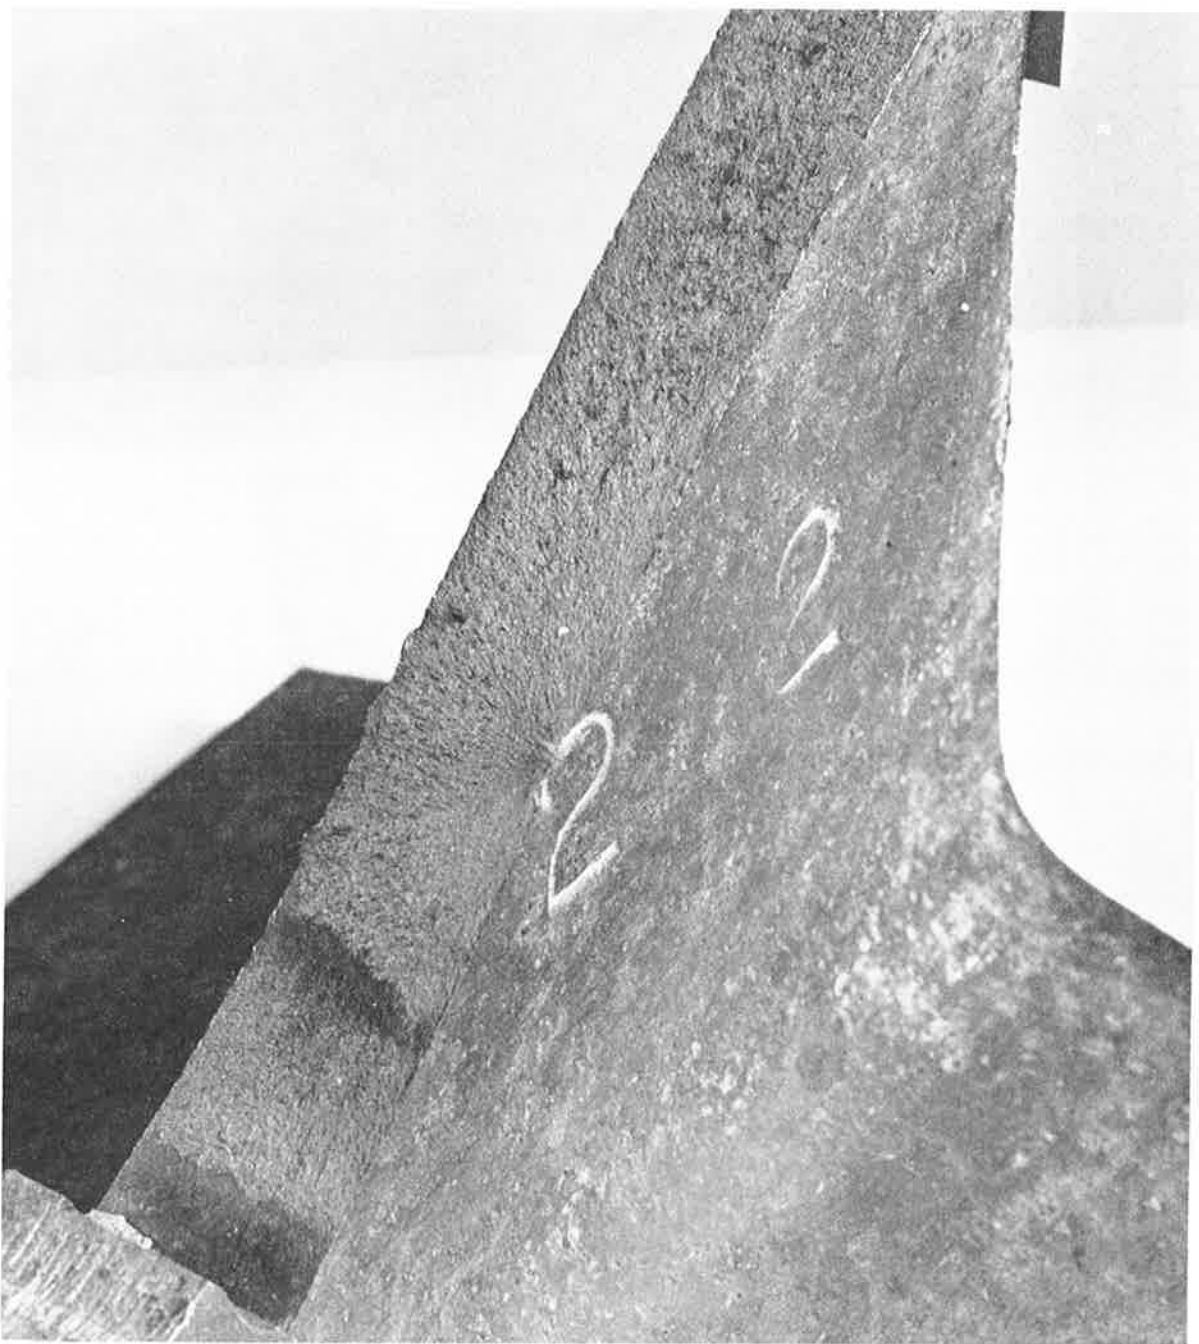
Specimen 6B-6: View of Fracture Surface Near Primary Origin
